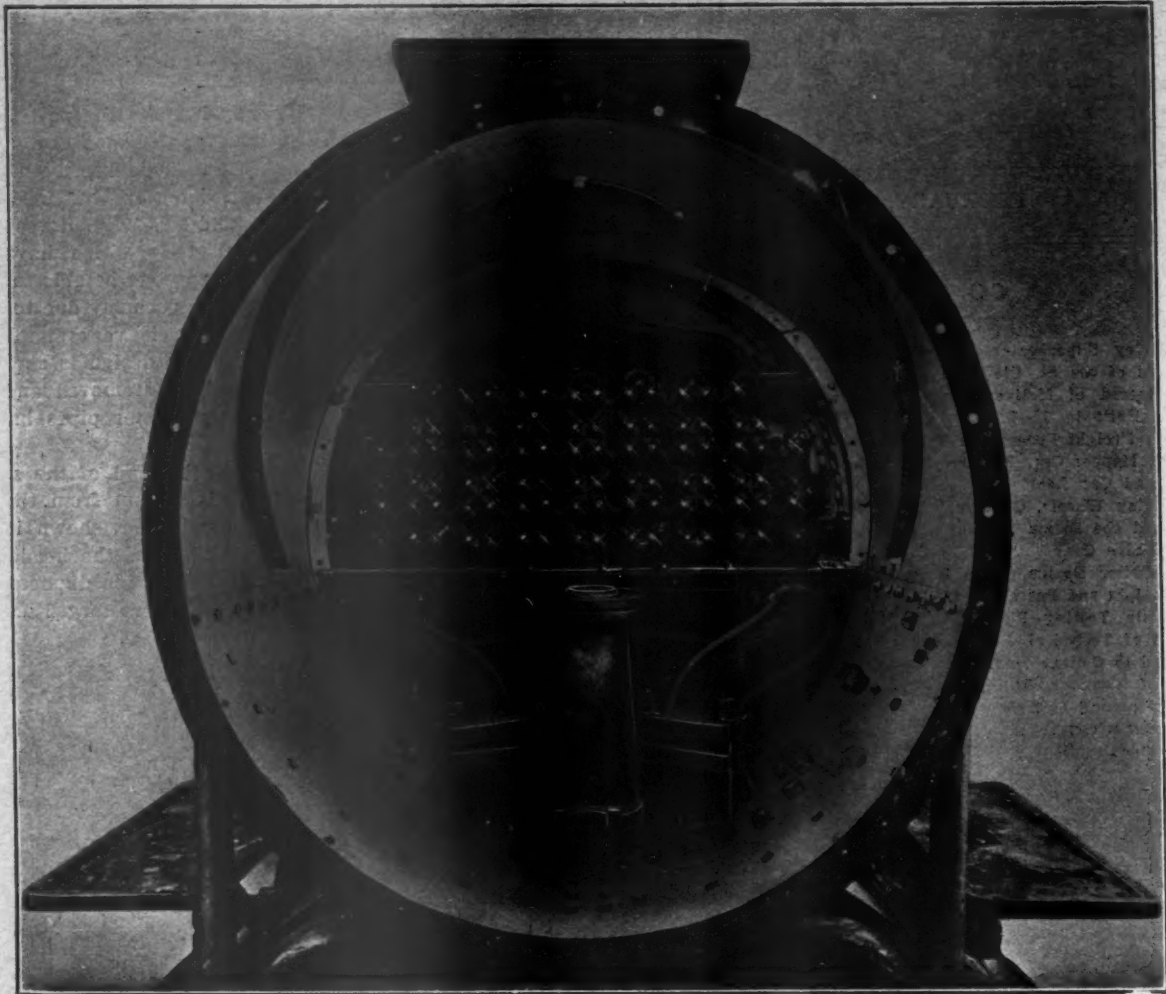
FRONT END SHOWING ARRANGEMENT OF HEADERS AND SUPERHEATER TUBES.
